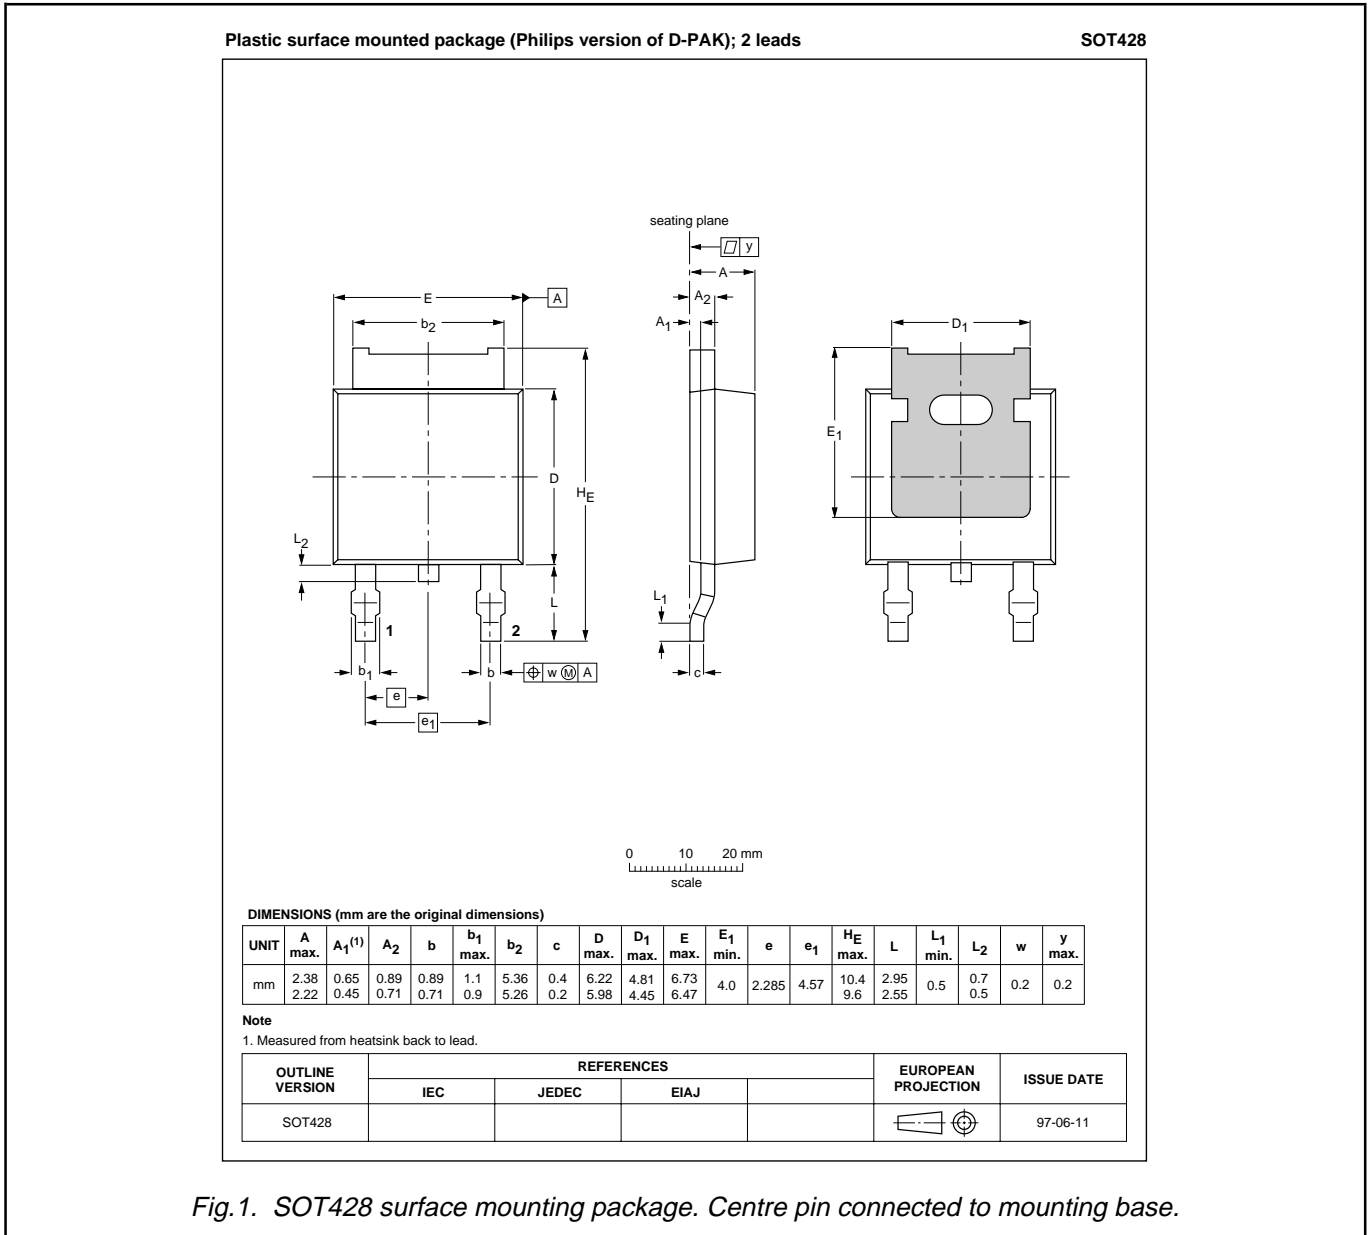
SOT428 surface mounting package. Centre pin connected to mounting base.
